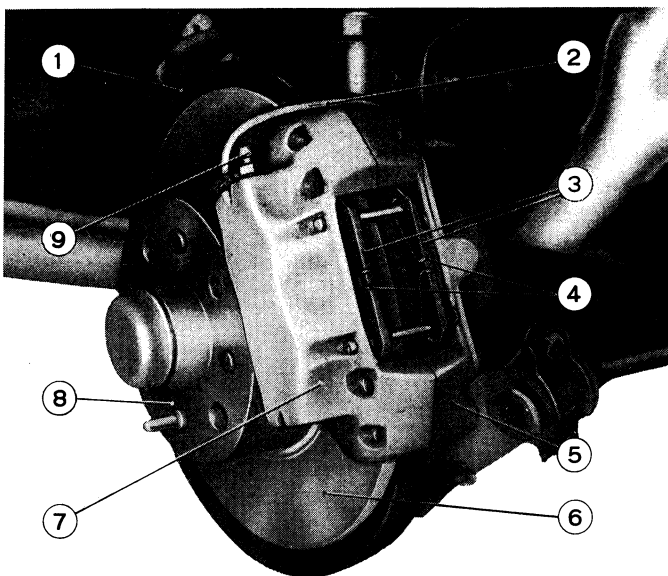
Right front wheel disc brake assembly - 1500 Cabriolet.
